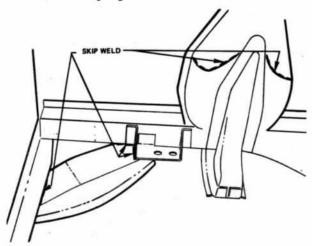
Front Structure Welding Reinforcement.
